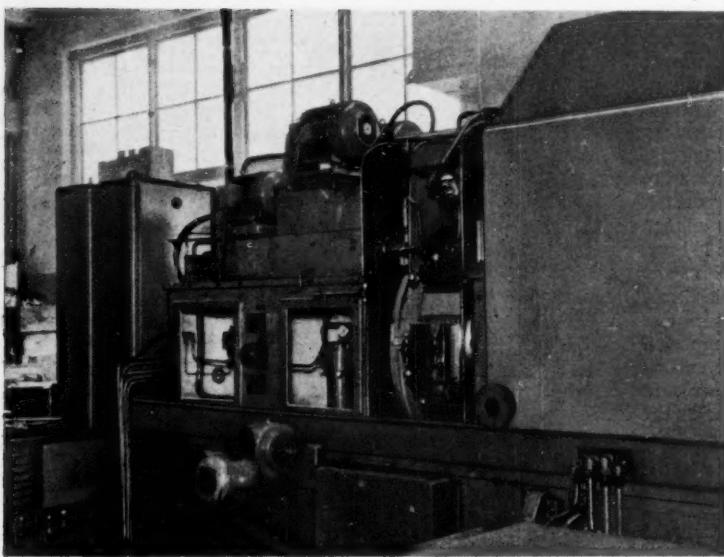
A Rear View of the Large Hüller Special-purpose, Multi-spindle, Indexing Drum Machine for Drilling, Recessing and Fine-boring King-pin Bosses
